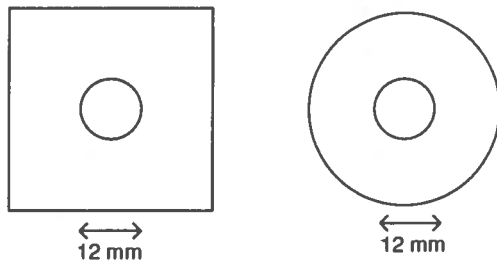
Examples of steel plates to which to fasten ring magnet with glass rod lens. Diameter of central hole between 10 mm and 15 mm. Overall shape and dimensions to suit lens holder.
